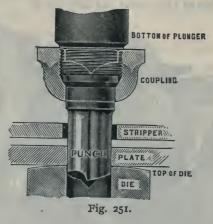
shows an enlarged view of the arrangement of the punch end of the machine illustrated in fig. 248; the operation is that of perforating a hole in a heavy plate;
